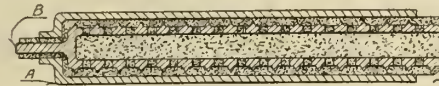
CASTING WHICH CRACKED AT "A."
